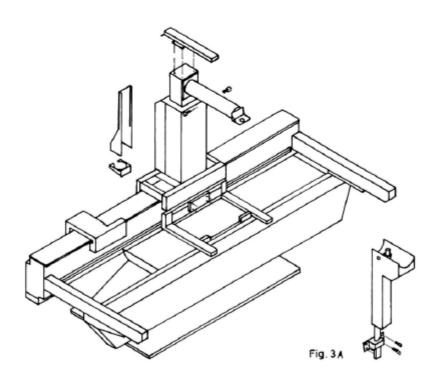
IMAGE INTENSIFIER TROLLEY ASSEMBLY
